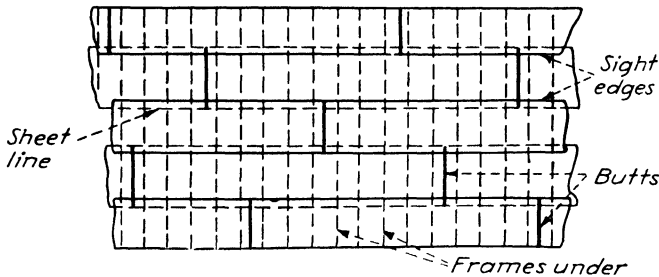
Method of shifting the butts of riveted shell plating. A shift is necessary to stagger the line of weakness where the plates are butted. This is not required in a welded shell.
